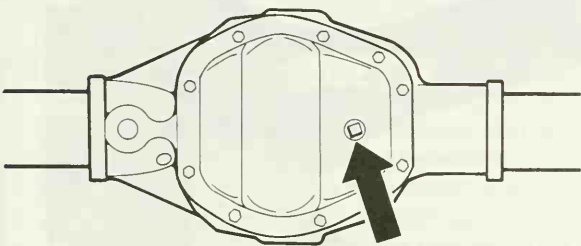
Fill plug in rear of differential housing is removed to check or fill with lubricant. (American Motors Corporation)
